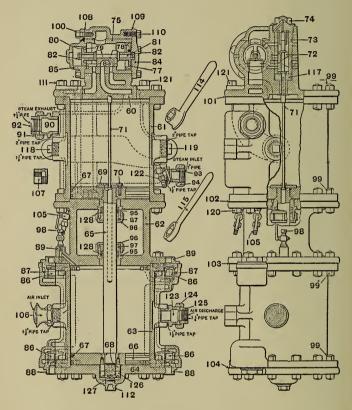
Westinghouse Eleven-Inch Air Pump.
